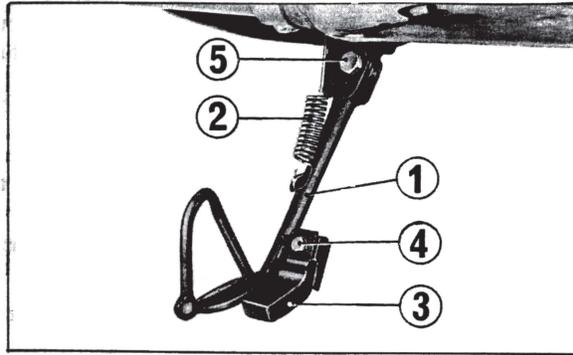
(1) Side stand bar (4) 6mm bolt
